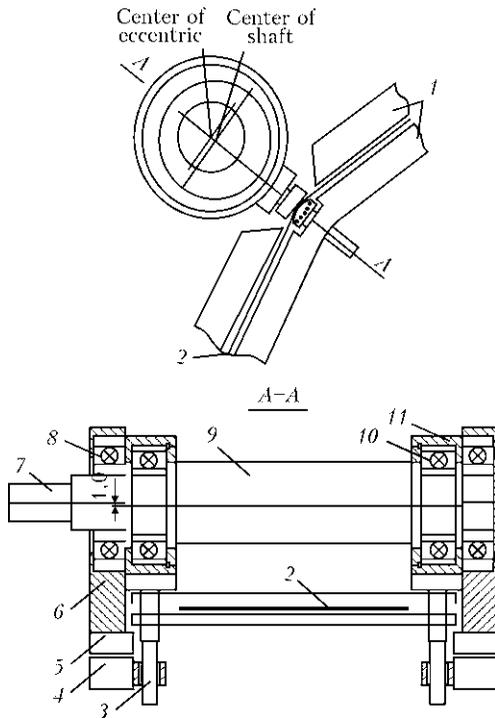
Scheme of transformation of transverse to longitudinal oscillations of the strip electrode tip: 1 – bent base; 2 – strip electrode; 3 – guide bolt; 4, 5 – plate bodies; 6, 11 – bearing bodies; 7 – shaft; 8 – shaft bearing; 9 – middle part of shaft-eccentric; 10 – eccentric bearing
